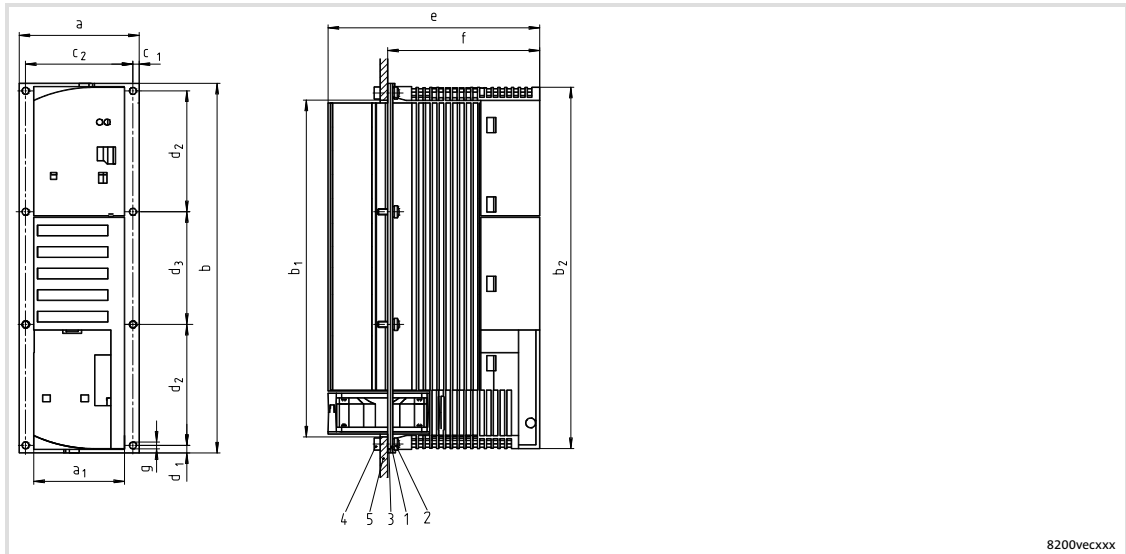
Dimensions for thermally separated mounting 1.5 ... 2.2 kW
